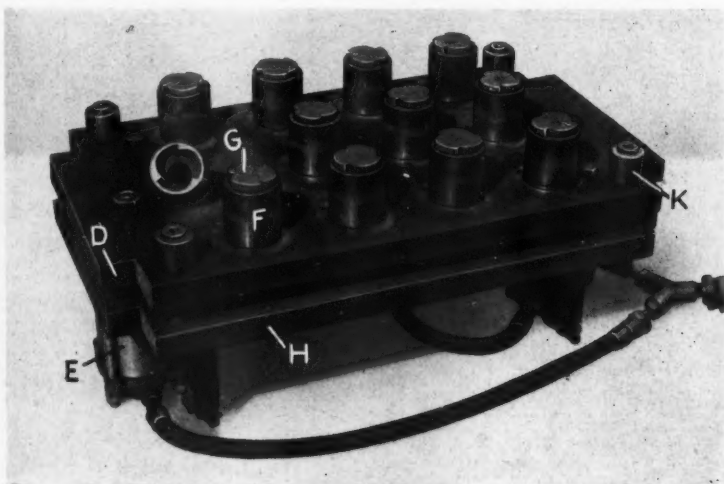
The metal pattern from which the mould in Fig. 2 is made. Air-operated stripping is employed
